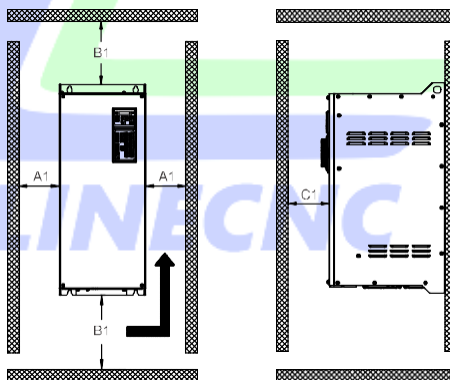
Single drive mounting clearances (NG80P-4T0.75GB to NG80P-4T220G)
